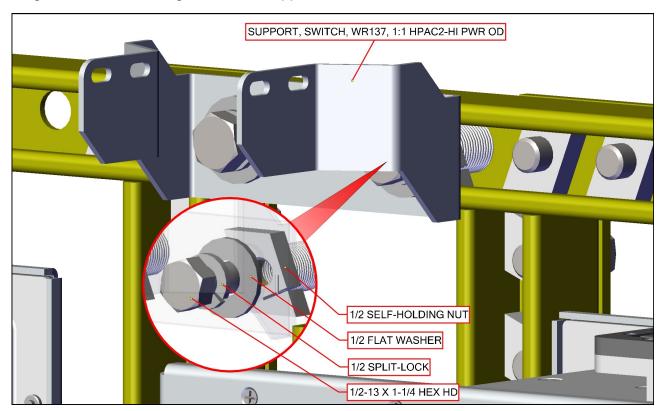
Mounting Switch Support to Frame, C-Band (typical)
